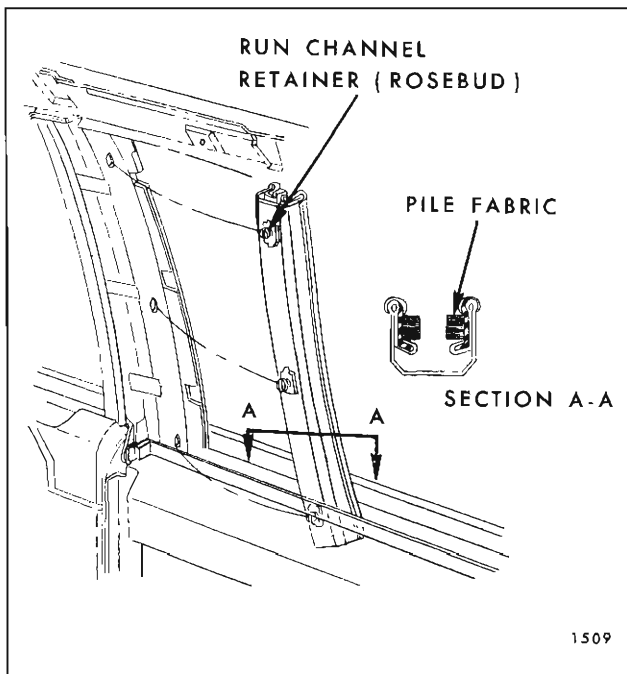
E20—Rear Quarter Window Front Glass Run Channel "15" - "11" Styles
